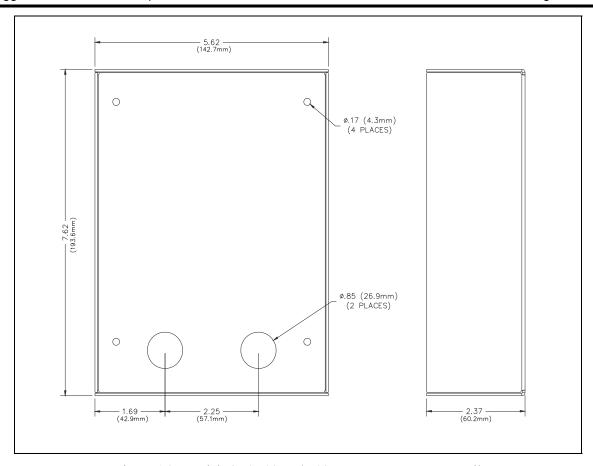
Models 276-702BH/-702BHAC Dust Cover Detail
